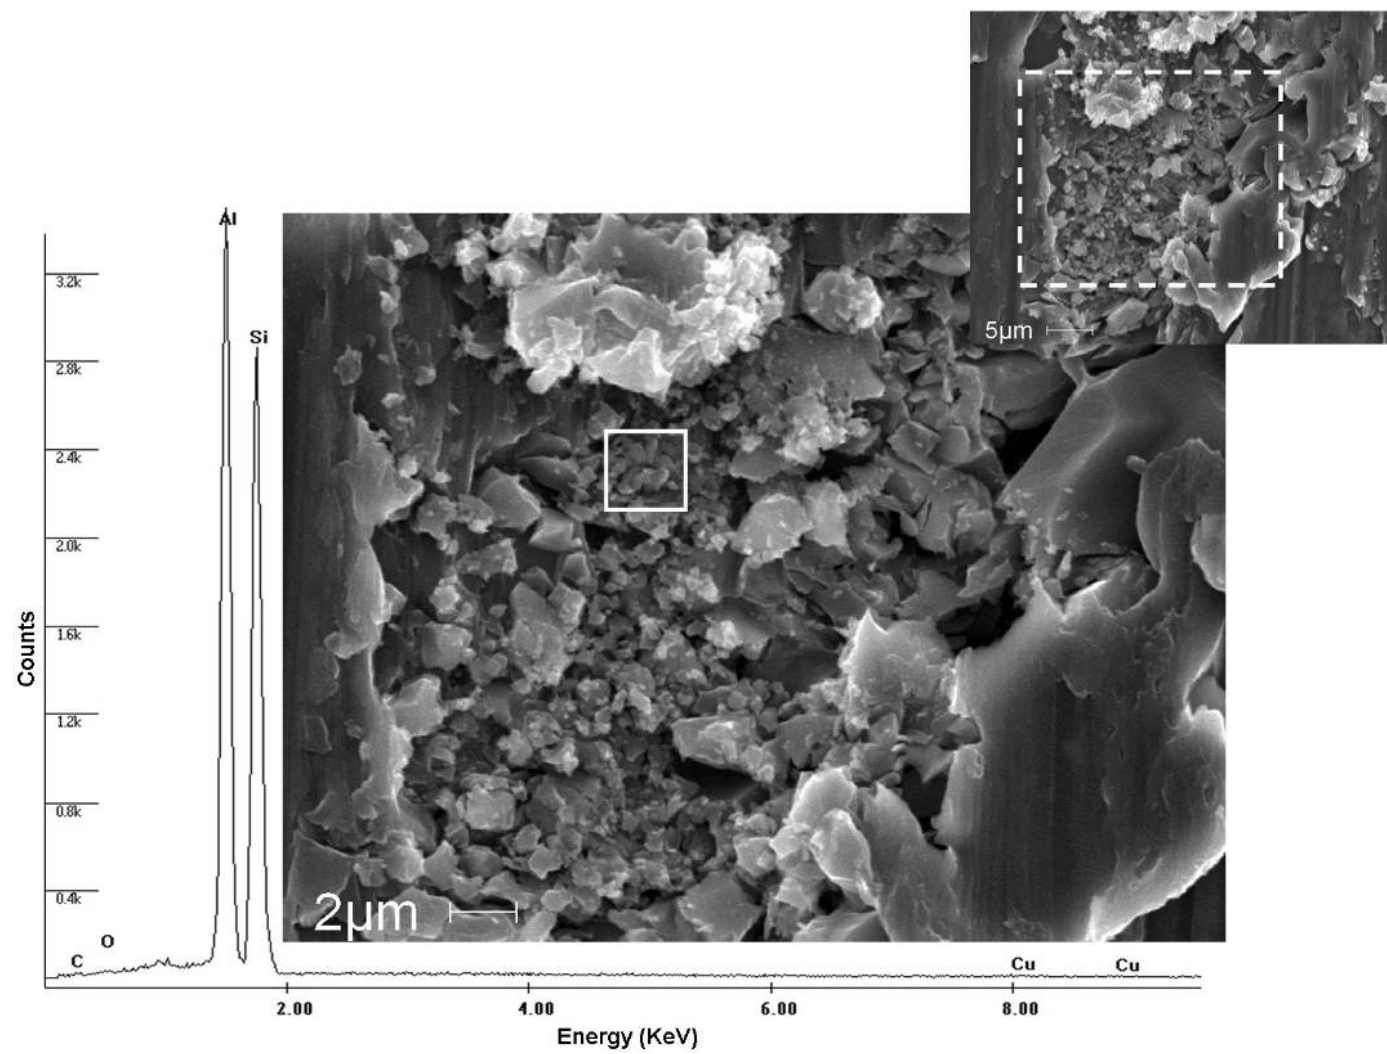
SEM images showing extensive fracture of second phase particles on the machined surface from sample machined under cutting speed of 115m/min and feed per revolution of 0.45mm.
